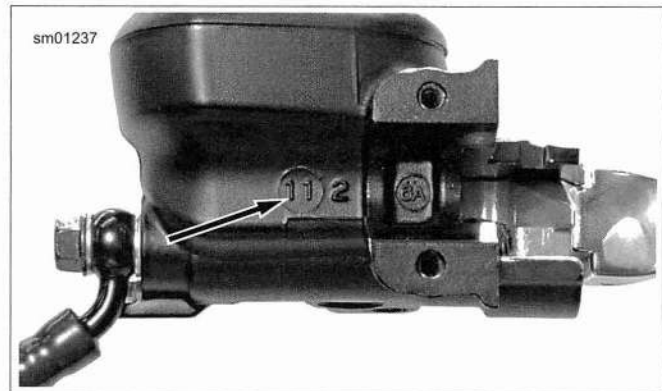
Verifying Front Brake Master Cylinder Bore Size (single disc master cylinder)
